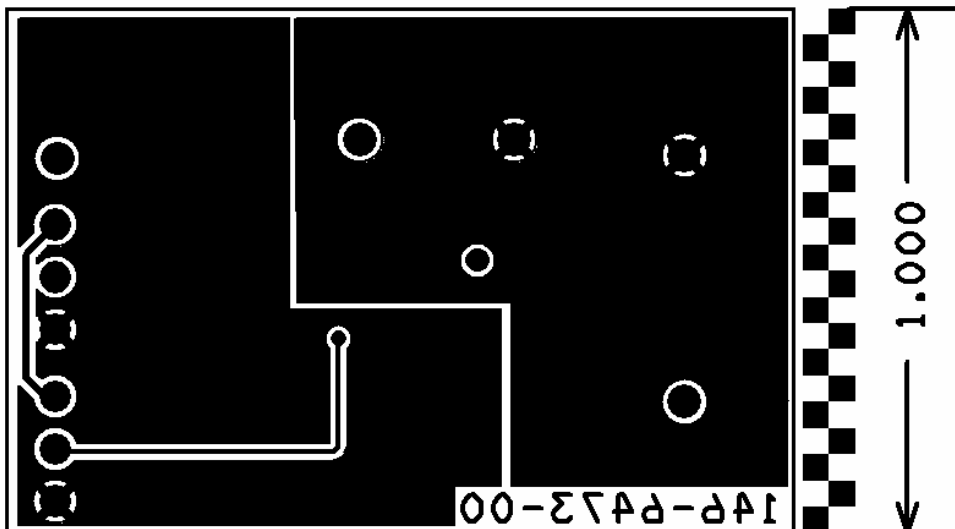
SP6651AEU PC LAYOUT BOTTOM SIDE
